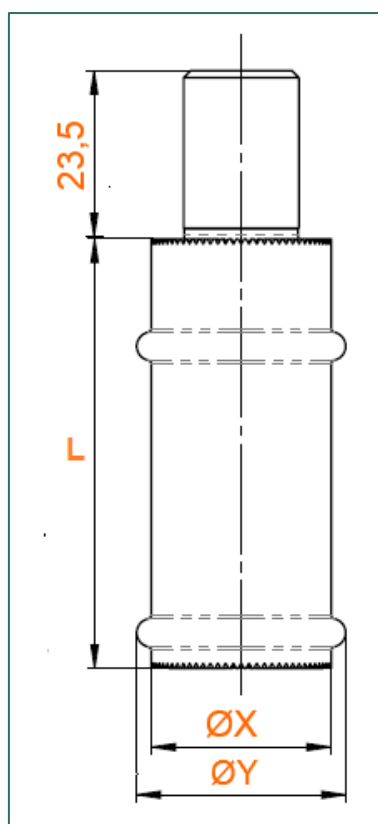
DIMENSIONS OF THE MUTARS® EXTENSION PIECE
